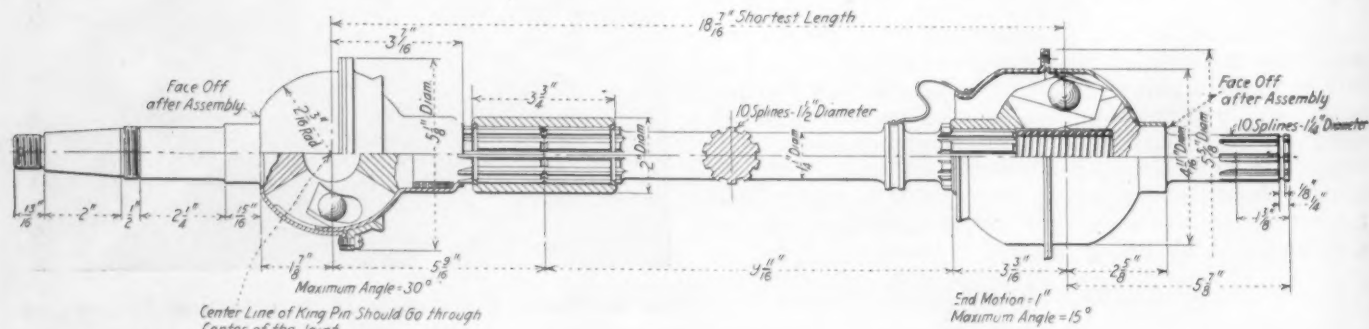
WEISS UNIVERSAL-JOINT AND SHAFT CONSTRUCTION
